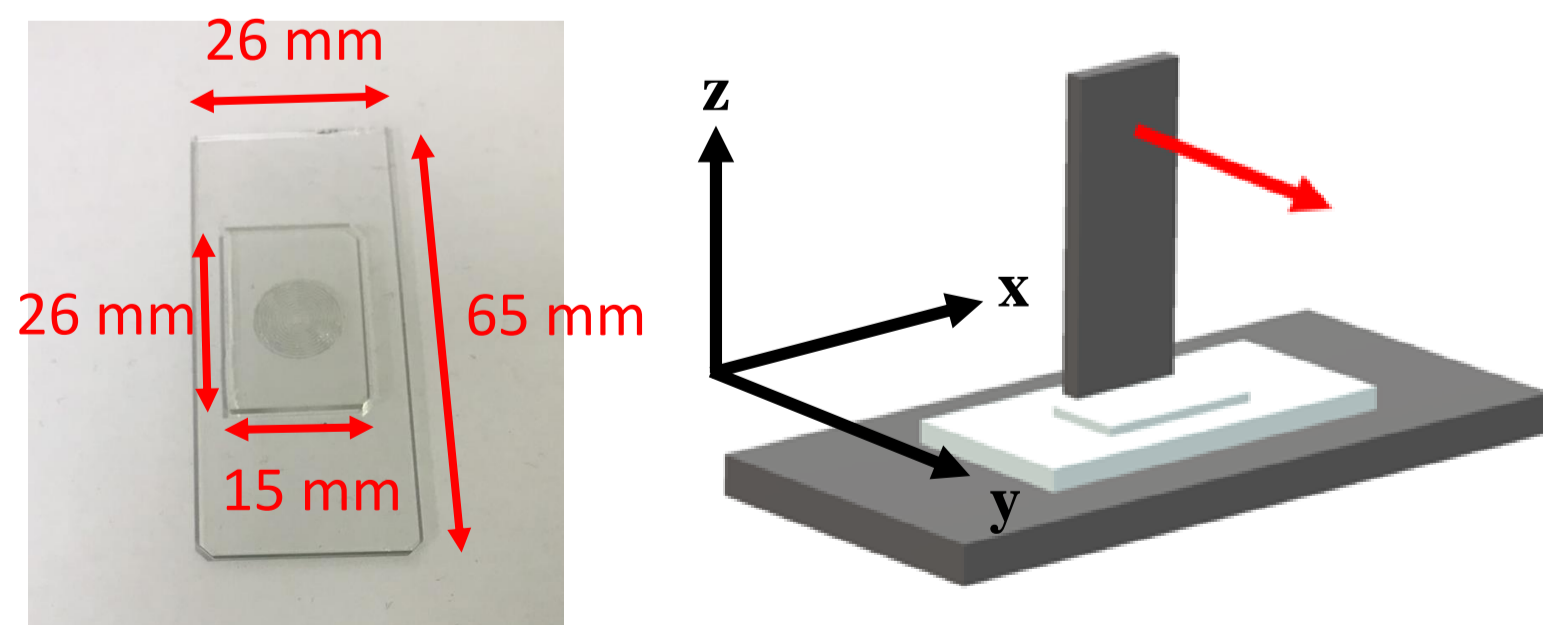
The welding glass sheets and the schematic diagram of how we test the adhesion
